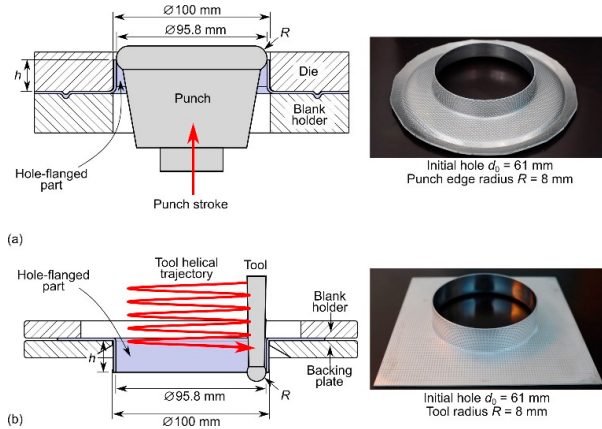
Schema of hole-flanging processes and parts manufactured by (a) PW and (b) SPIF1.
